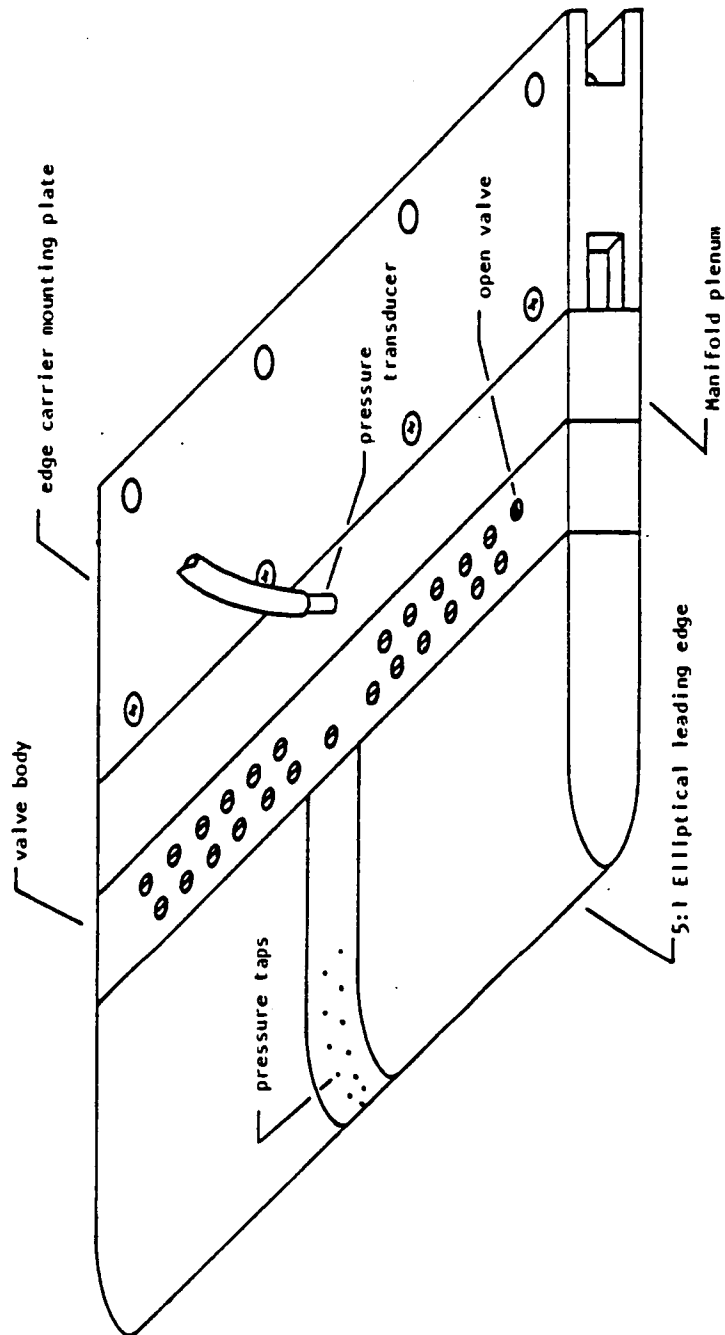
Overall view of all the pieces clued and bolted together and ready to mount on the edge carrier. (Scale 2.5:1)
